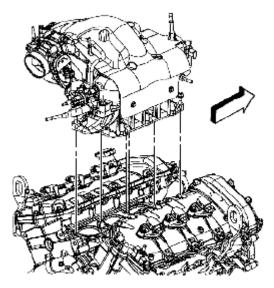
Identifying Upper Intake Manifold And Gasket Courtesy of SUZUKI OF AMERICA CORP.
